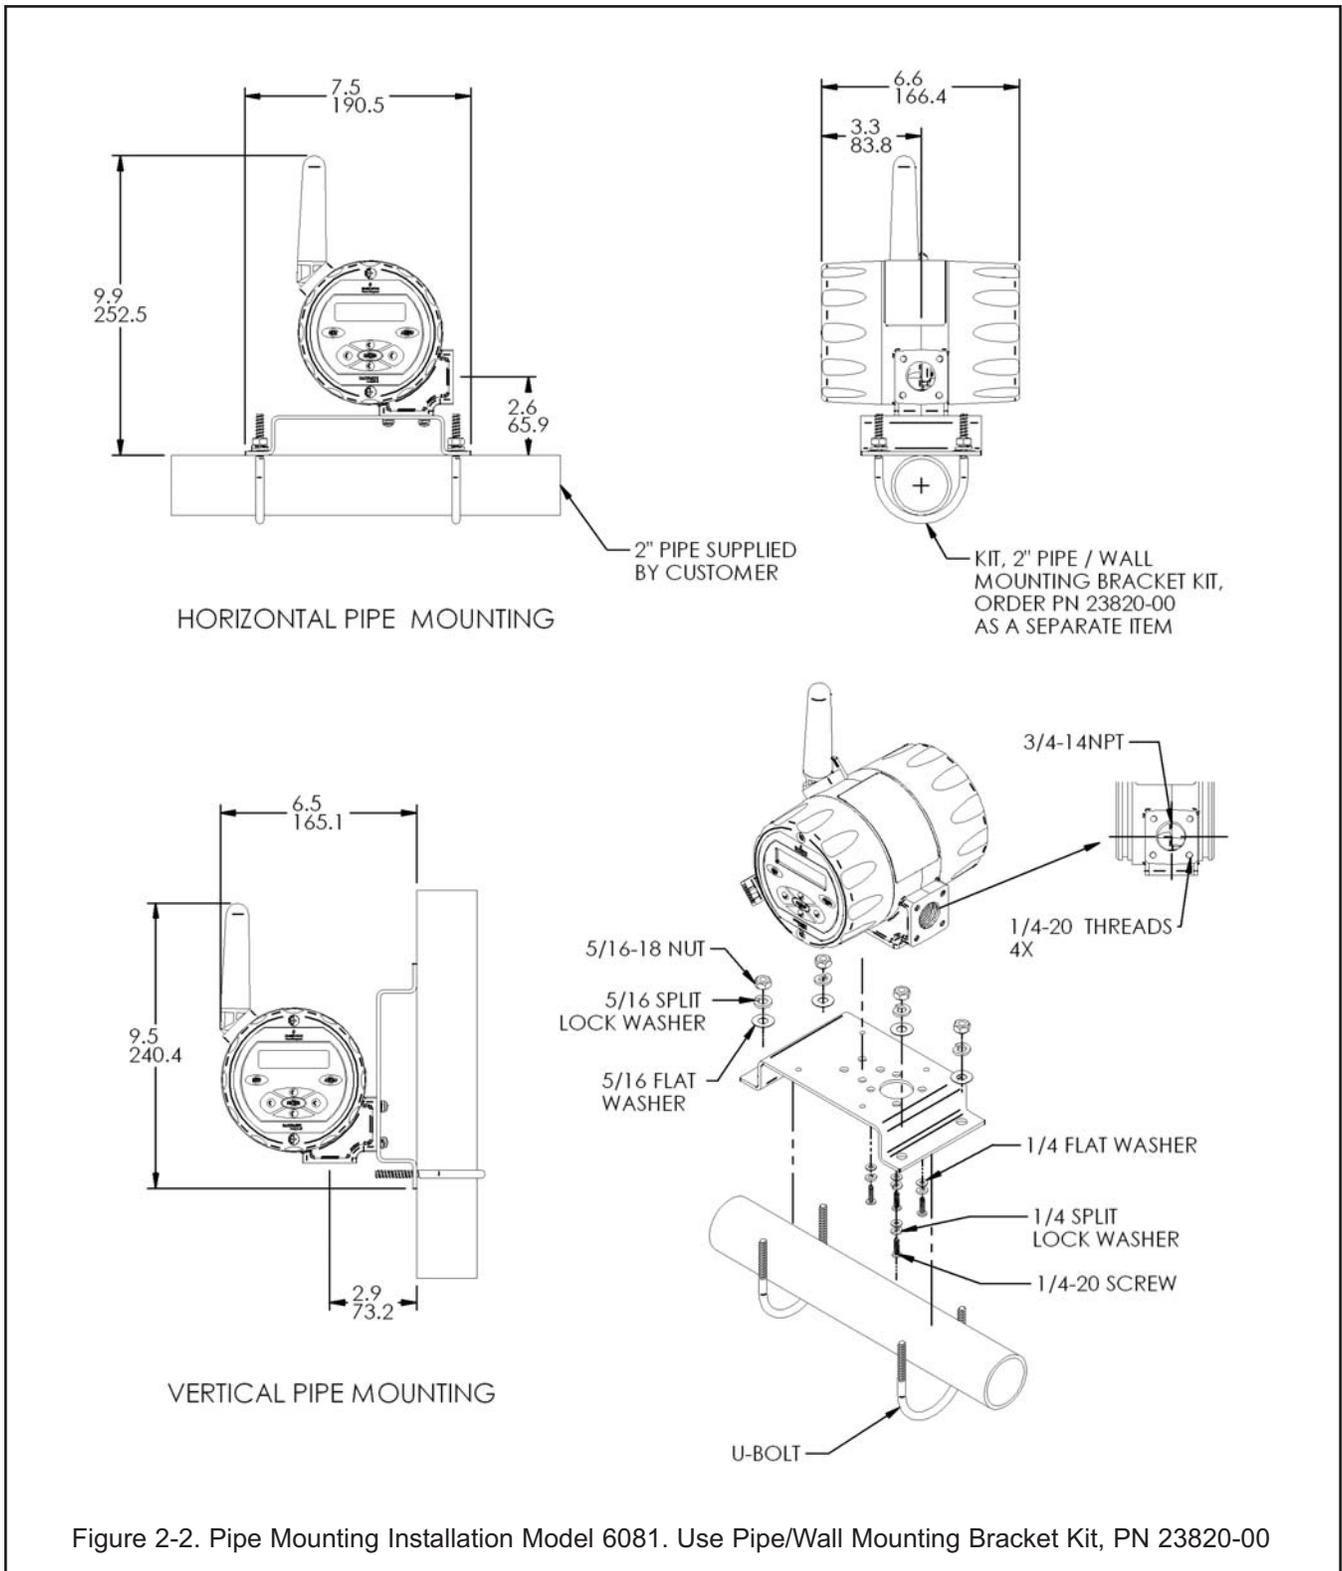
Pipe Mounting Installation Model 6081. Use Pipe/Wall Mounting Bracket Kit, PN 23820-00
